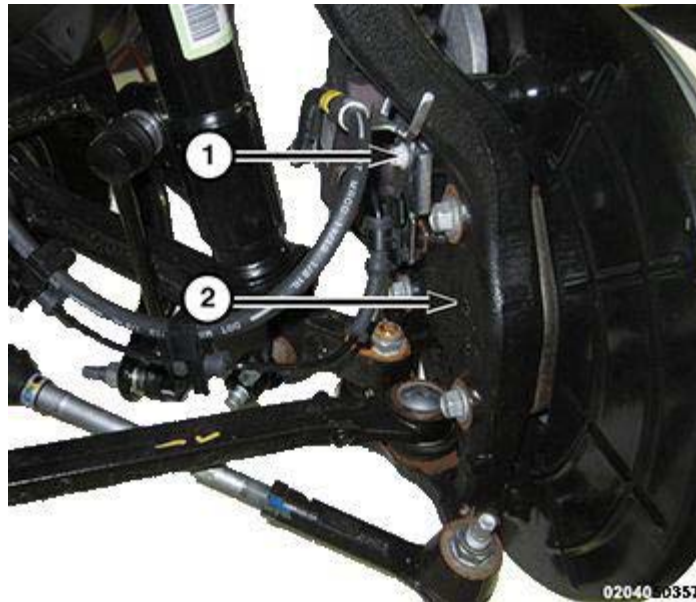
Front Brake Hose Support Bracket Bolt & Knuckle
